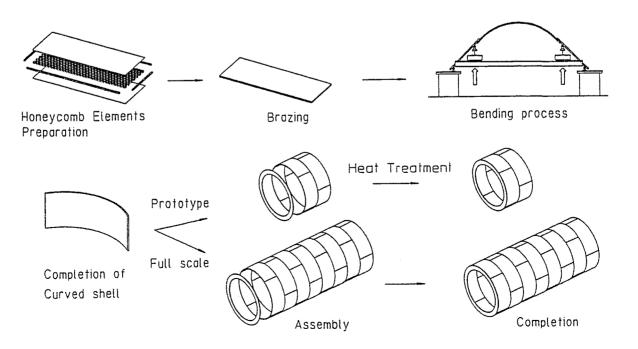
Fabrication steps of a brazed honeycomb vacuum vessel.
